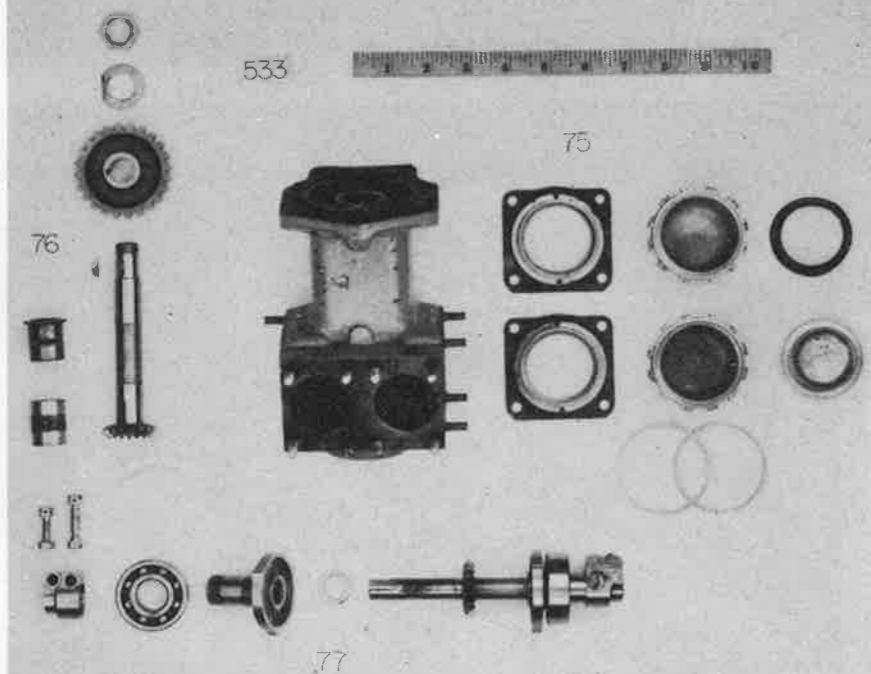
Machine Gun Synchronizer (CSE-2963). 30029
